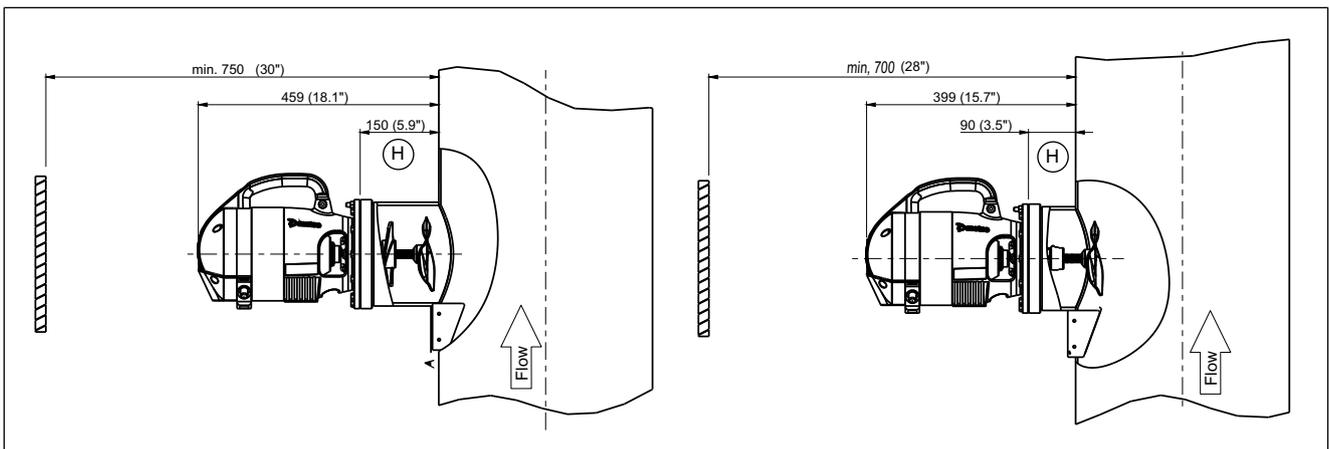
Profile dimensions of process coupling, H. coupling dimension.
